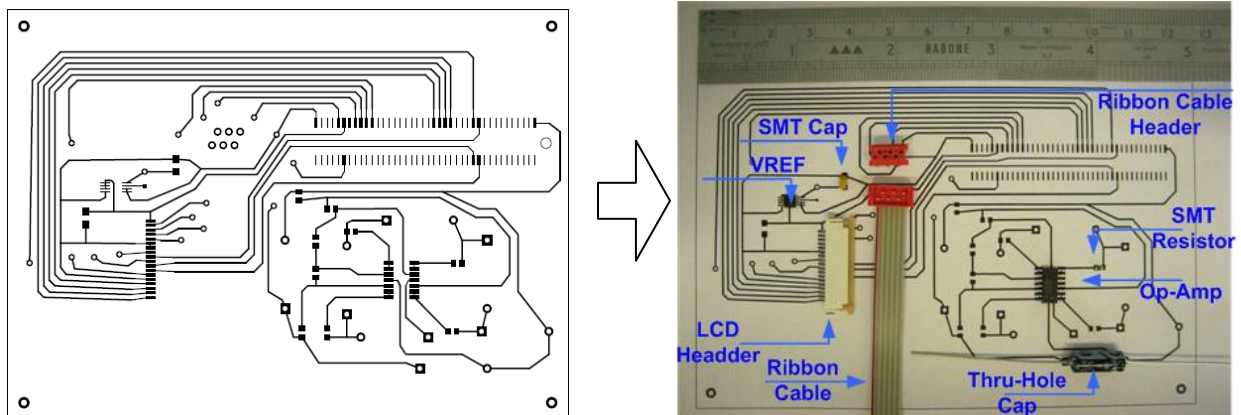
Topside of LCD driver circuit PCB version two with components
